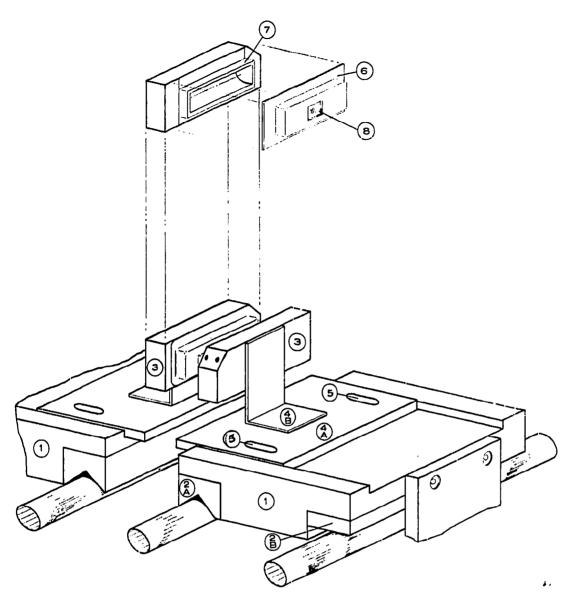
Geiger-Muller counters and saddles. I = aluminium saddle; 2A and B = saddle bearing pads; 3 = Geiger-Muller flow counters; 4A = slicing plate; 4B = brass support bracket; 5 = screw slots; 6 = push-on cover for Geiger-Muller counter; 7 = Geiger-Muller counter boss; 8 = collimating aperture ($I \text{ cm}^2$).
